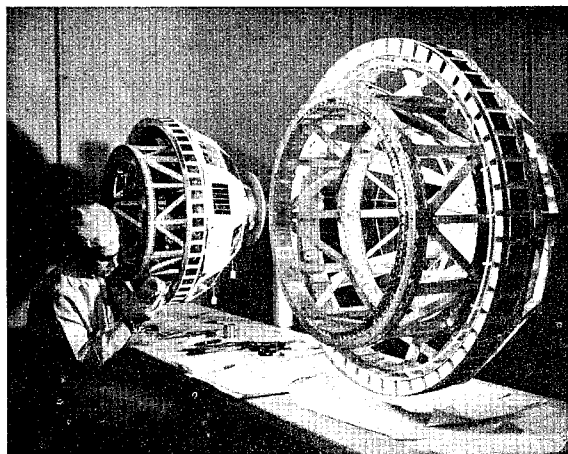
Lower hemispheres of Telstar satellite in process of assembly.
